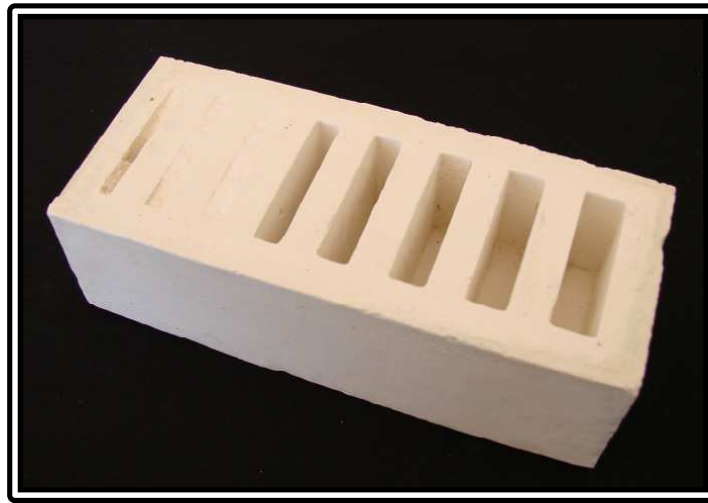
Test geometry 6 – re-test – plaster of Paris mould
